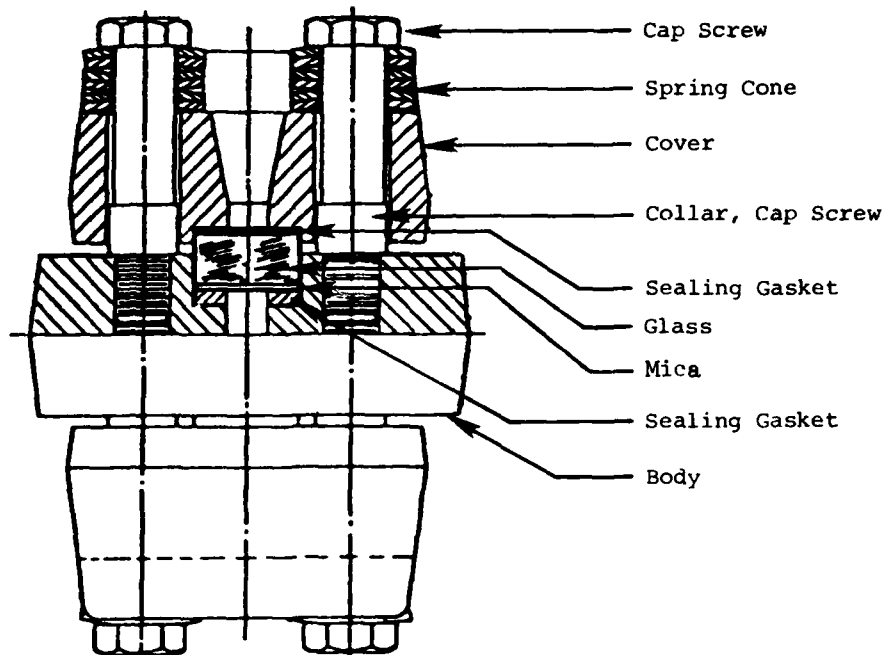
YARWAY 2,500 PSI, FLAT GLASS WATER GAUGE ASSEMBLY
